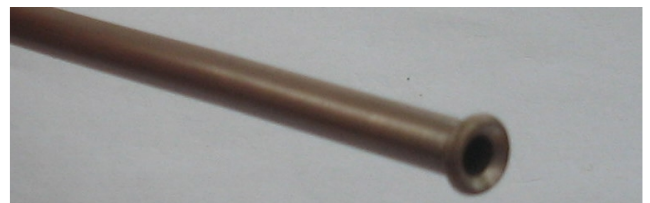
A Double Flare formed on a piece of ¼ inch tube.
